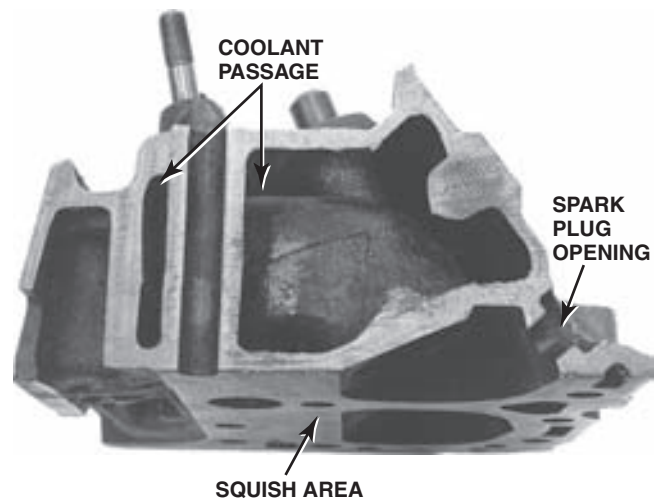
A wedge-shaped combustion chamber showing the squish area where the air–fuel mixture is squeezed, causing turbulence that pushes the mixture toward the spark plug.
